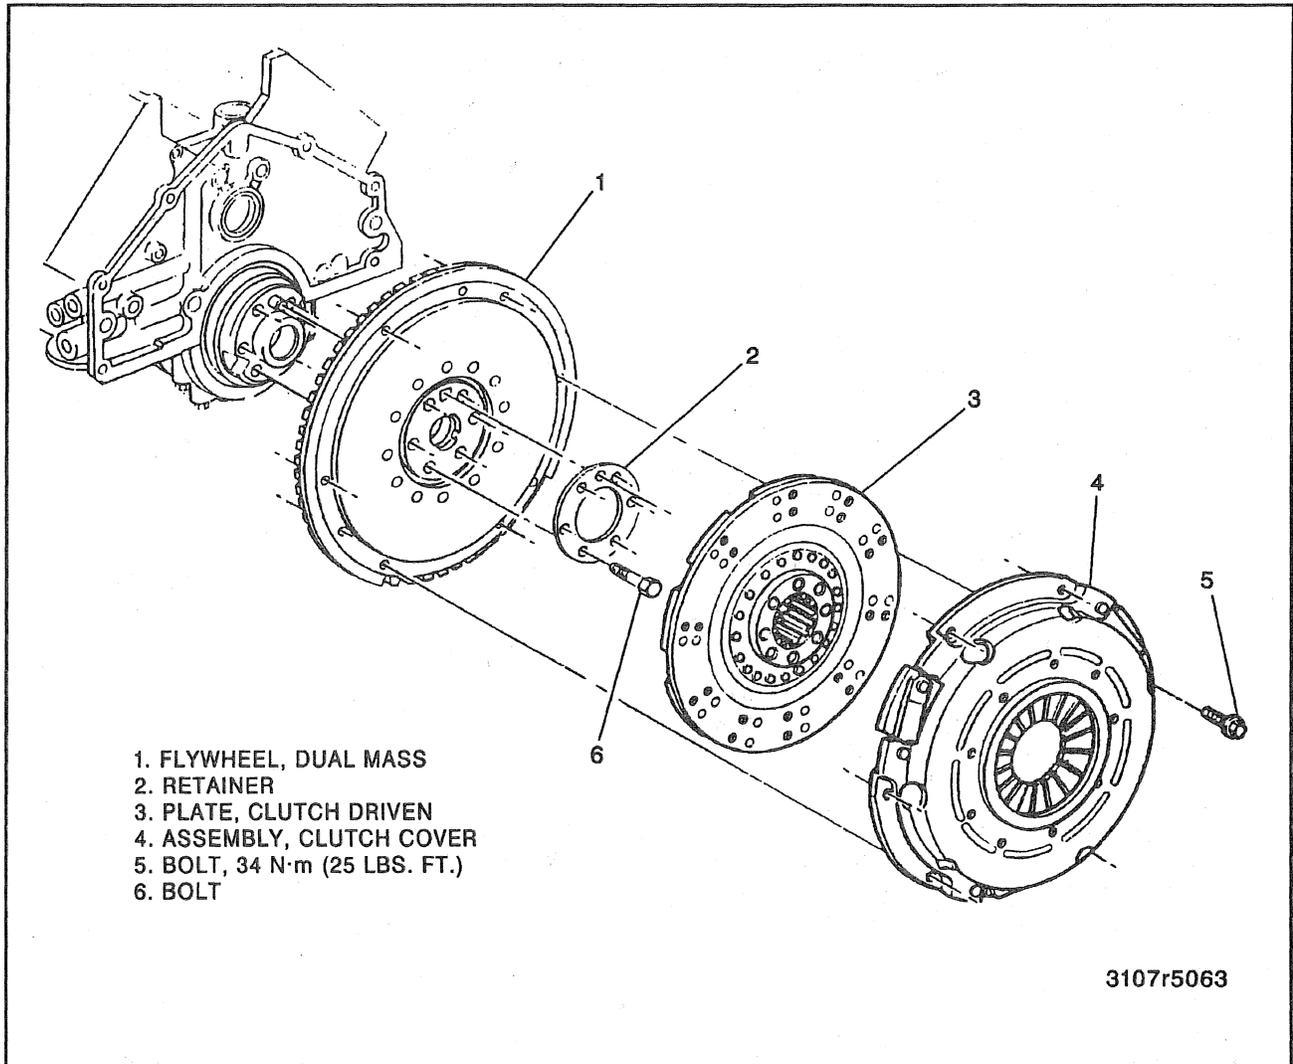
Clutch Assembly (Dual Mass Flywheel)
